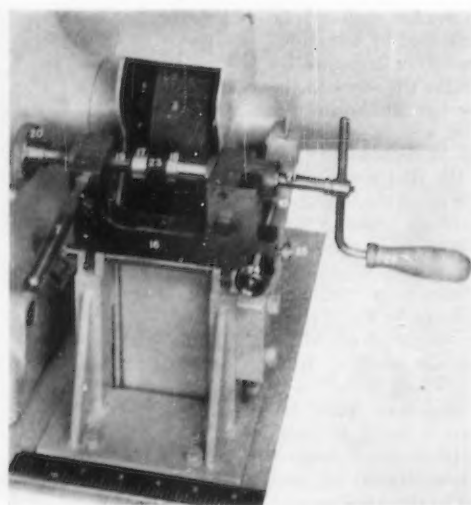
Attachment on Grinding Machine for Preparing Cylindrical Specimens of Flexible Materials.
